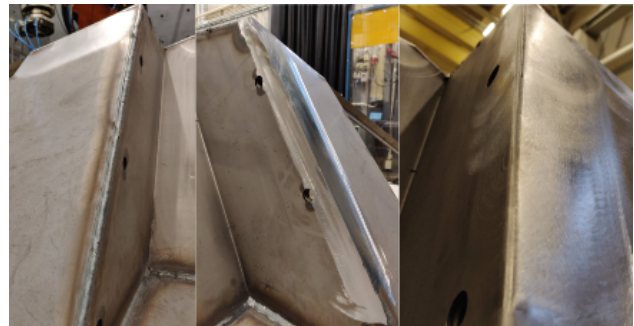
Grinding skill in different phases in left to right: seam after welding, seam after vertical grinding and fully grinded seam [12]
